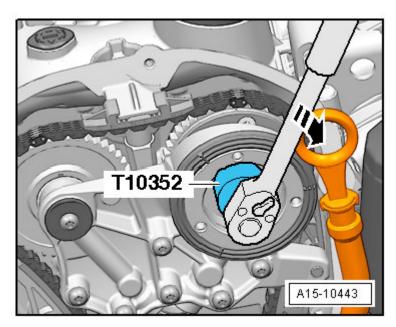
Identifying Assembly Tool T10352 To Remove Control Valve
